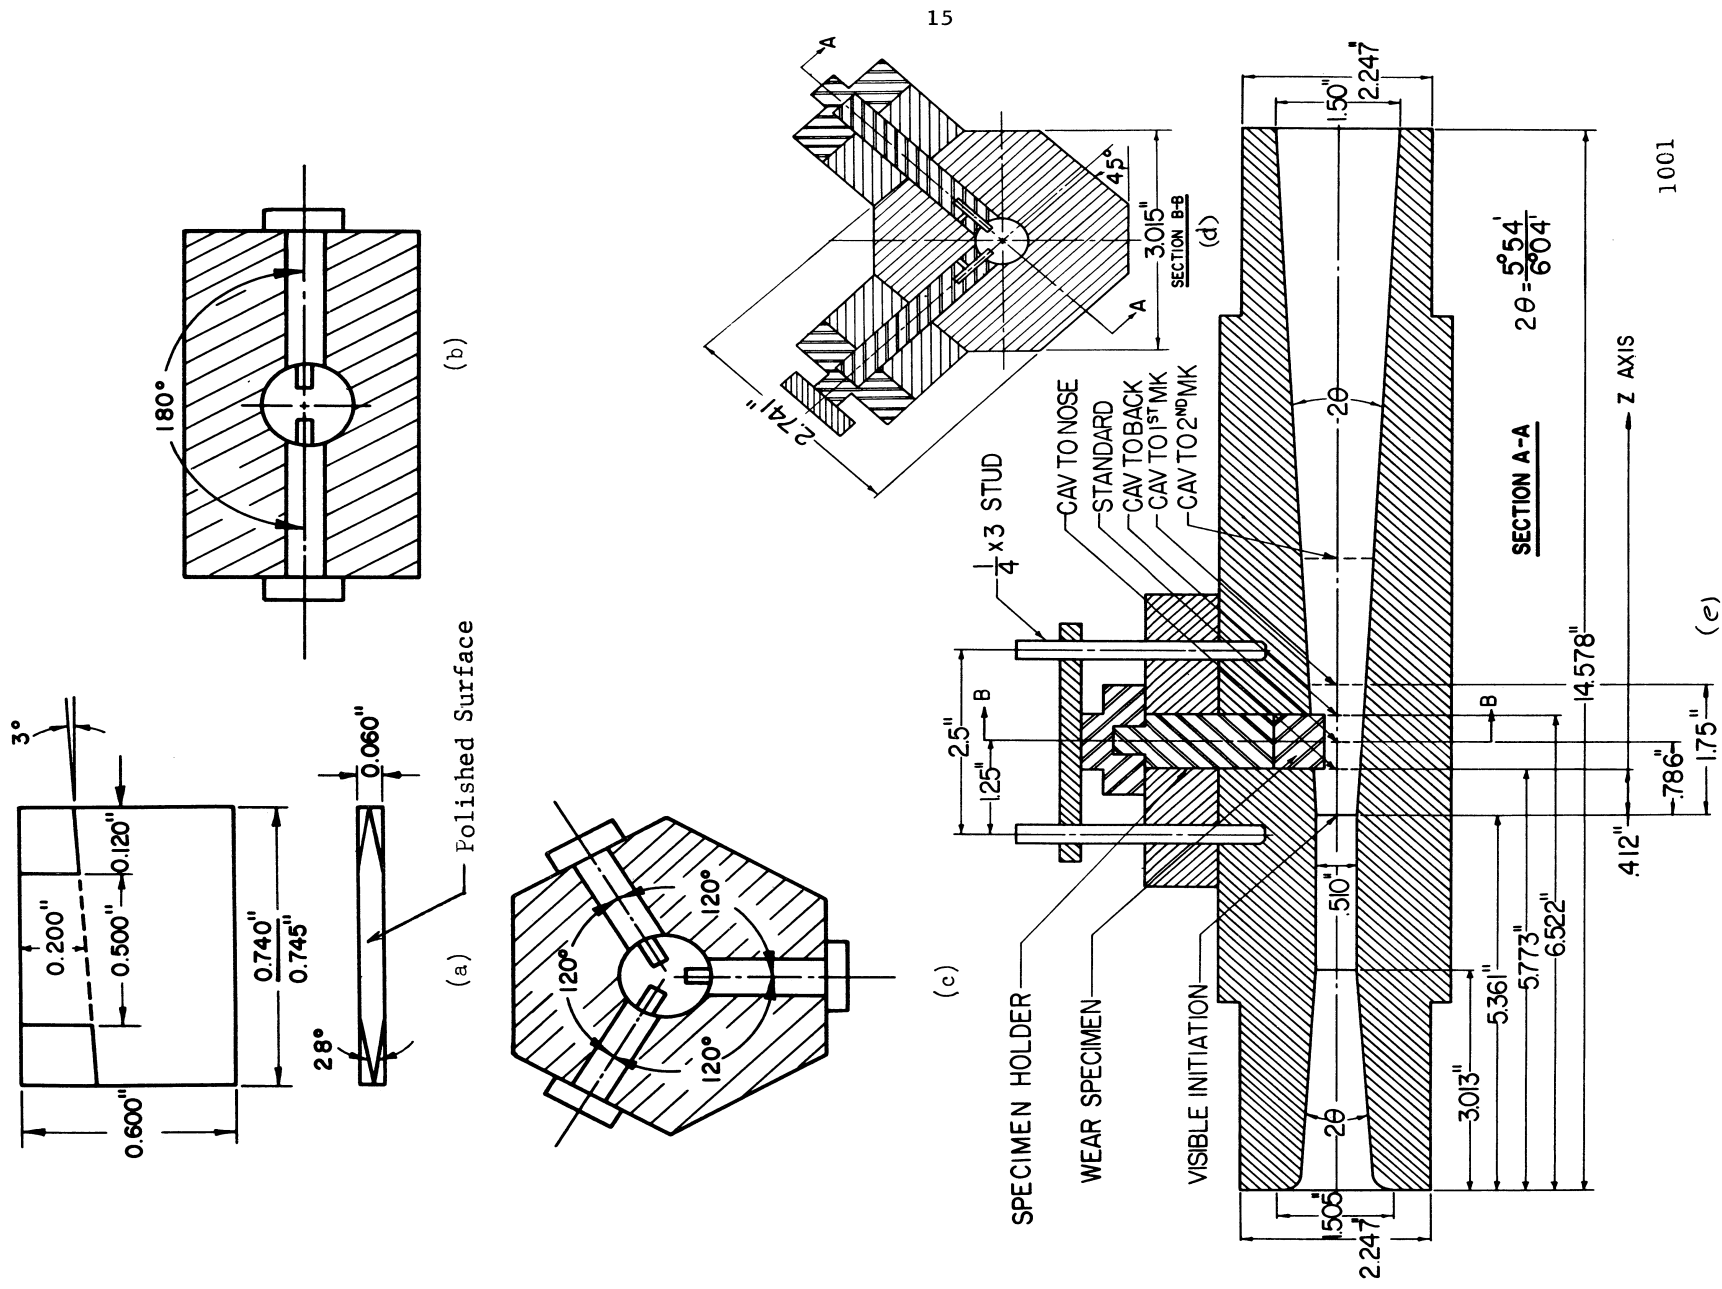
Schematic drawing of the damage test venturimeter showing nominal flow passage, axial specimen location, cavitation termination points, and (a) test specimen dimensions, (b) two specimen symmetrical arrangement for mercury, (c) three specimen symmetrical arrangement for water, (d) two specimen unsymmetrical arrangement for earlier mercury tests.
